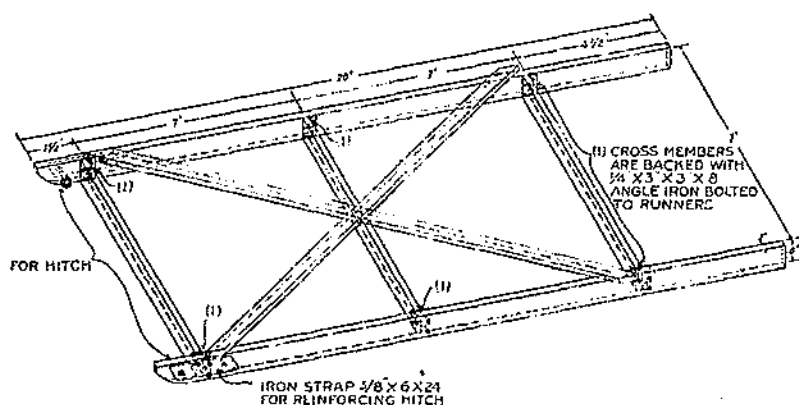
Working plan for constructing box drag, shown in figure 1.
